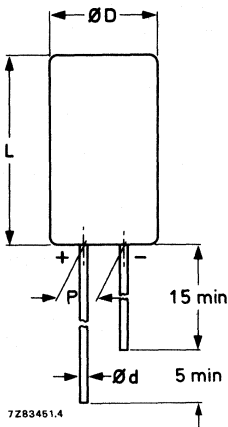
Style 1; see Table 3 for dimensions d, D, L and P.
